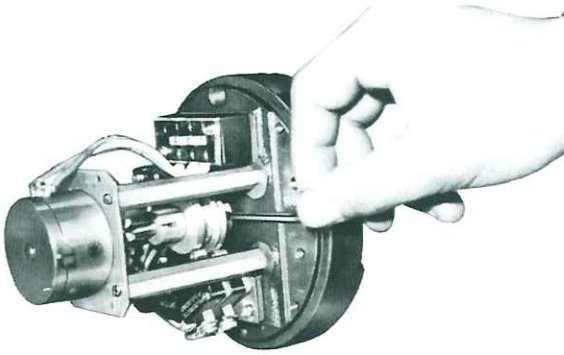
Loosening Micro-switch Cam Fixing Screw
